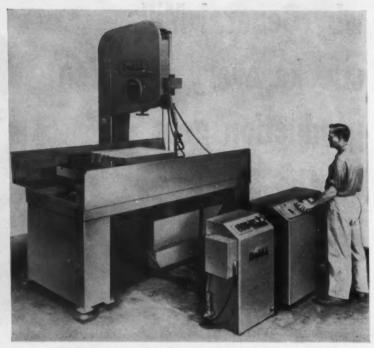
(Left) Cutting slab of stainless-steel honeycomb on Electro band machine.
